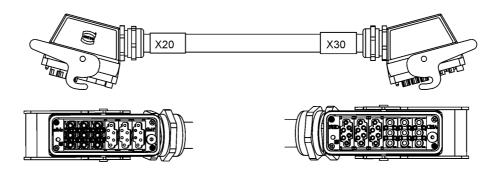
Connecting cable, motor cable, X20 - X30
